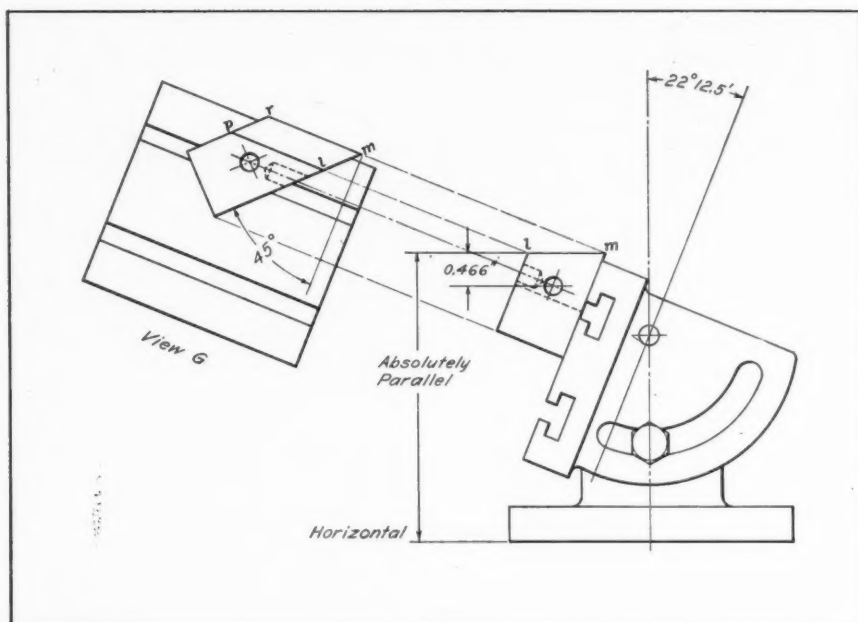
Showing how Compound-angle Block in Fig. 2 is Mounted on Angle-plate and Angle-plate is Positioned for Machining Compound-angle Face
